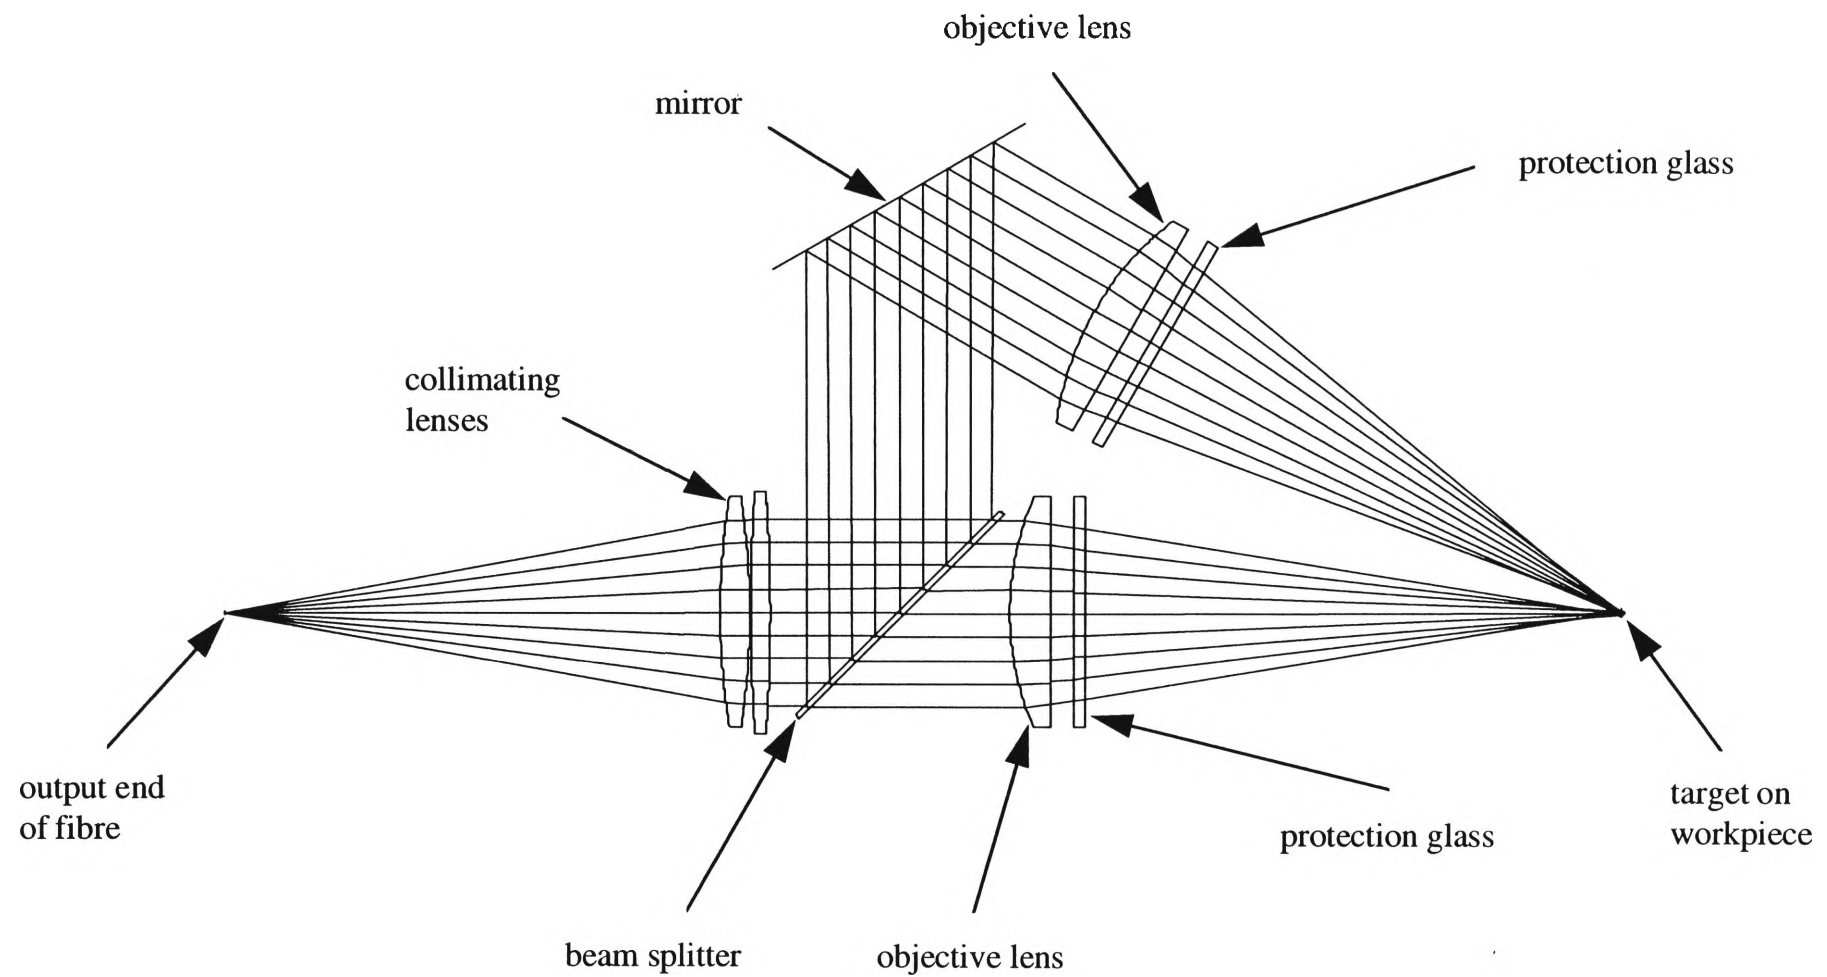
Ray diagram showing the optical components of the tandem fibre-optic laser welding head.
